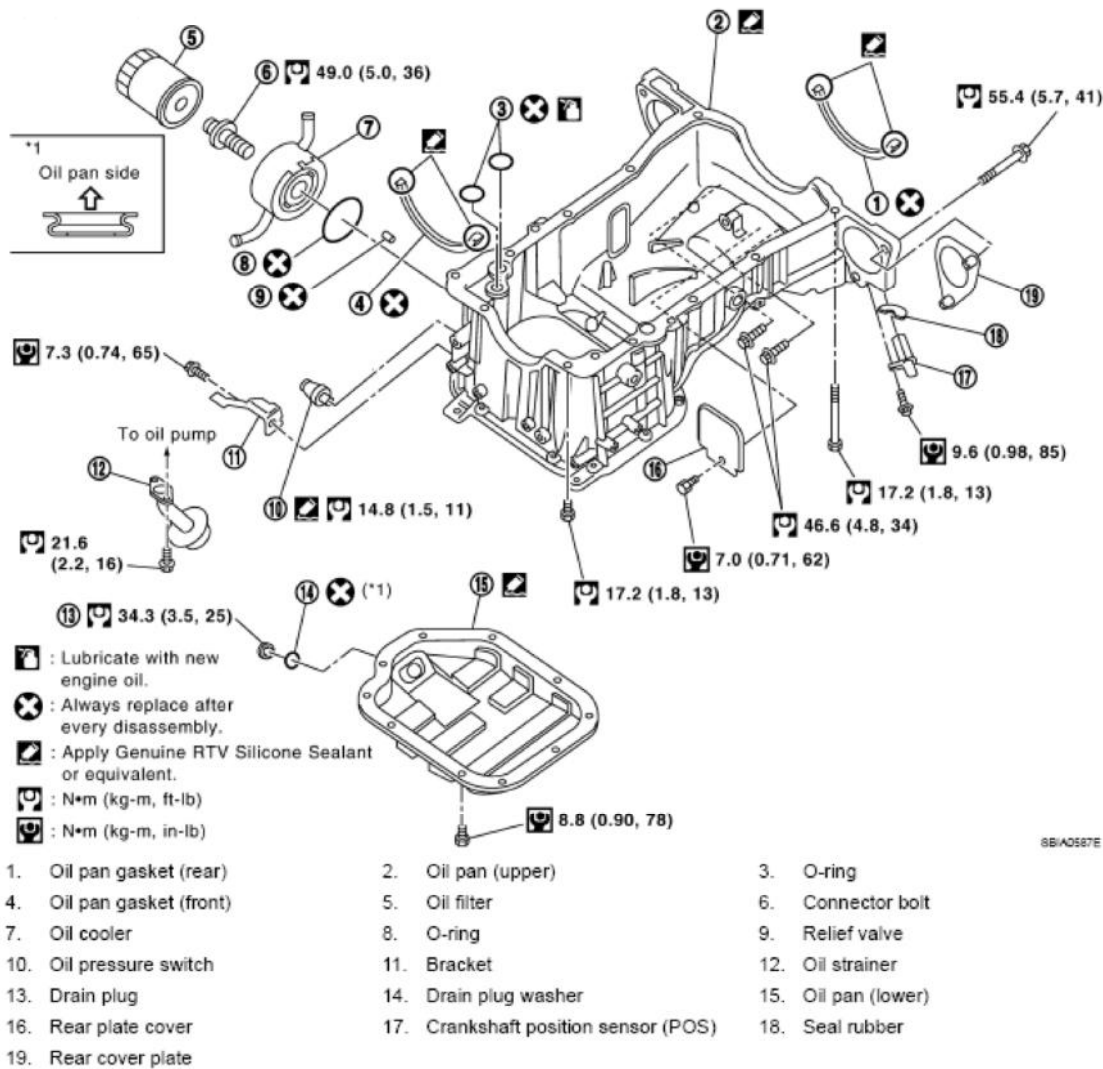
Identifying Oil Pan And Oil Strainer Components With Torque Specifications (2WD Models)
